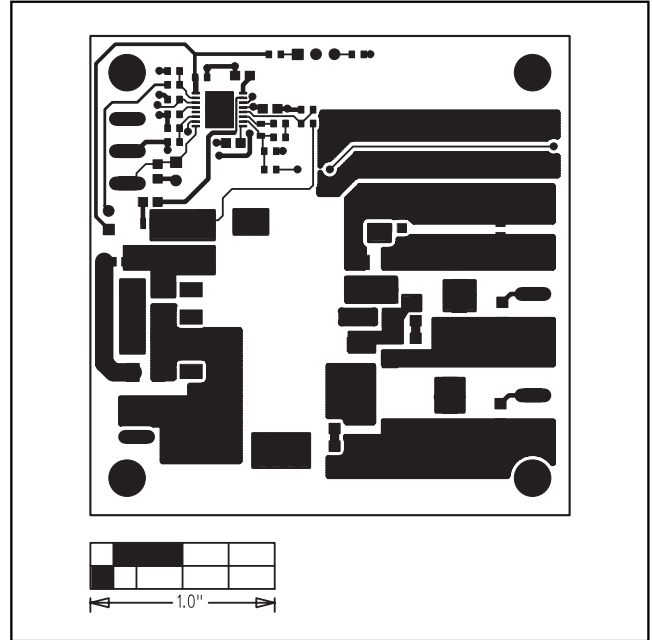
MAX15005A EV Kit PCB Layout—Component Side
